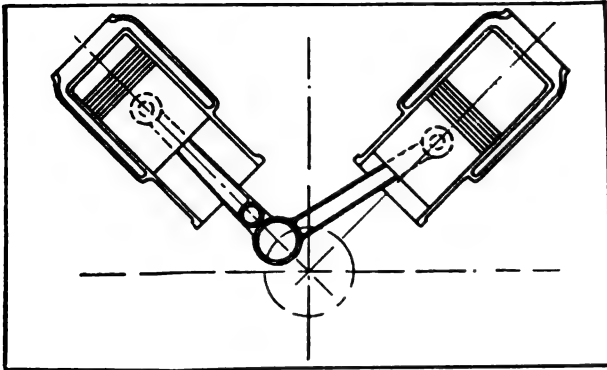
A Two-Cylinder V Type Motor, a Design Used for Eight or More Cylinders.
